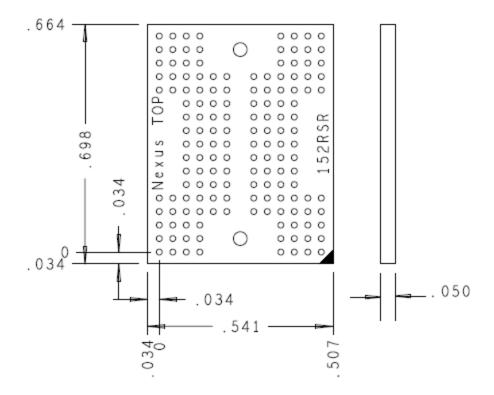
152 Ball Riser Mechanical Dimensions (sold separately)
